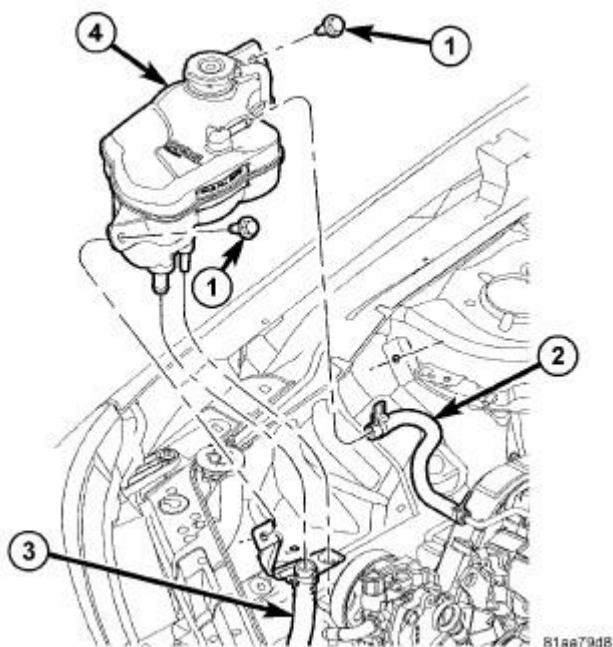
COOLANT RECOVERY CONTAINER - PRESSURE SYSTEM
